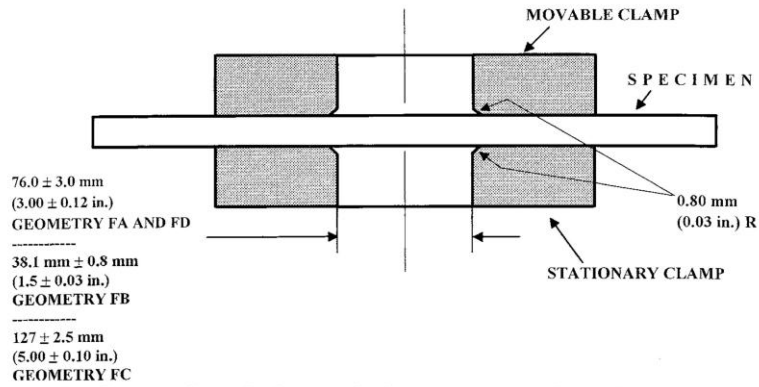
Support Plate/Specimen/Clamp Configuration for Geometries FA, FB, FC, and FD
